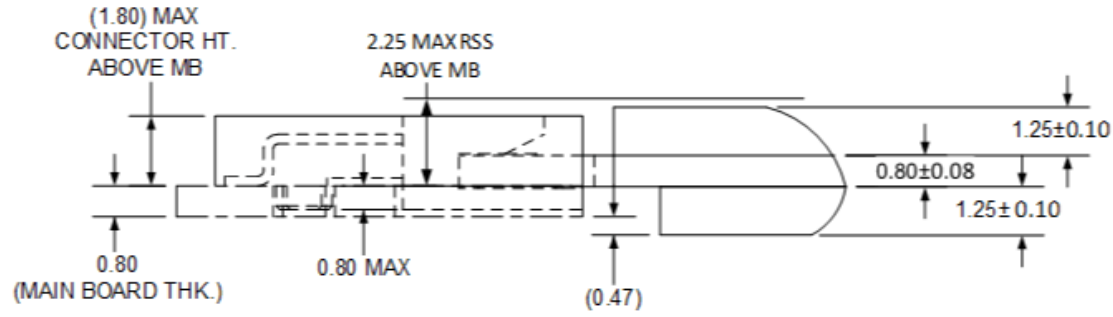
Stack-up Mid-mount (In-line) Double-sided (D2) Add-in Card Module for 1.35 Maximum Top-side Component Height
